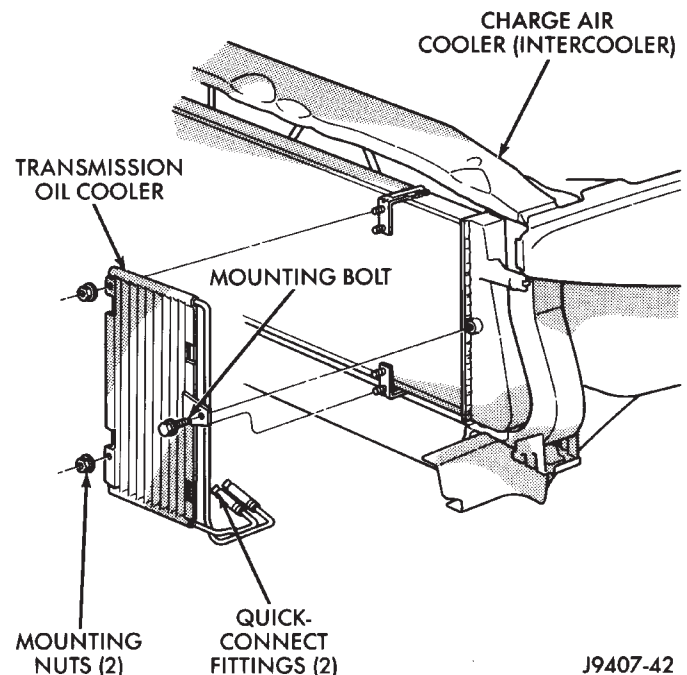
Auxiliary Transmission Oil Cooler—Diesel Engine
